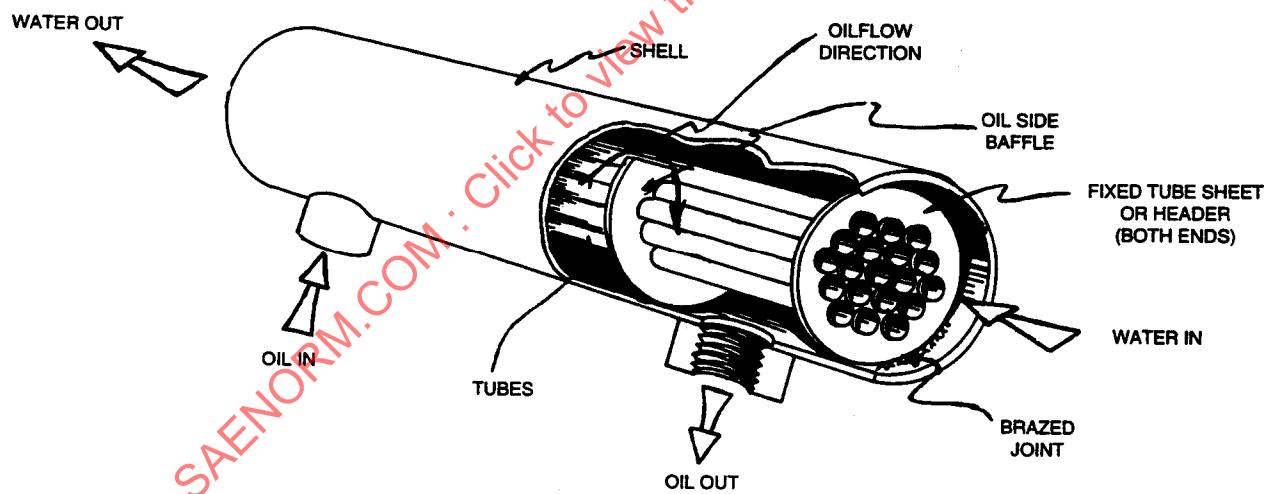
SHELL AND TUBE OIL TO WATER COOLER-FIXED BUNDLE
